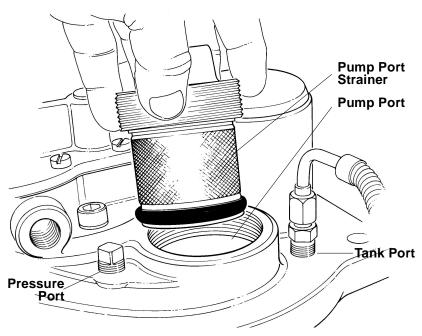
Strainer and Tank Port Fitting Installation (Red Jacket Pump)
